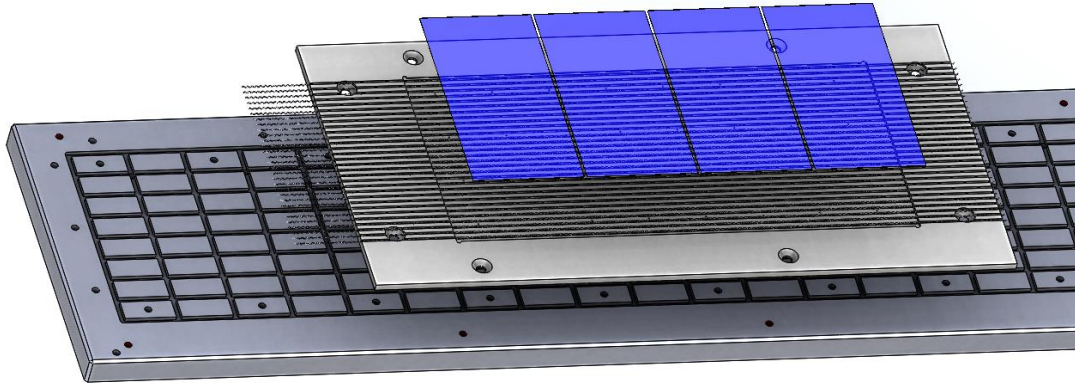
CAD drawing of the hotplate, the glass-fiber support plate, the wire interconnectors, and four half solar cells (size: 156 mm \times 78 mm).
